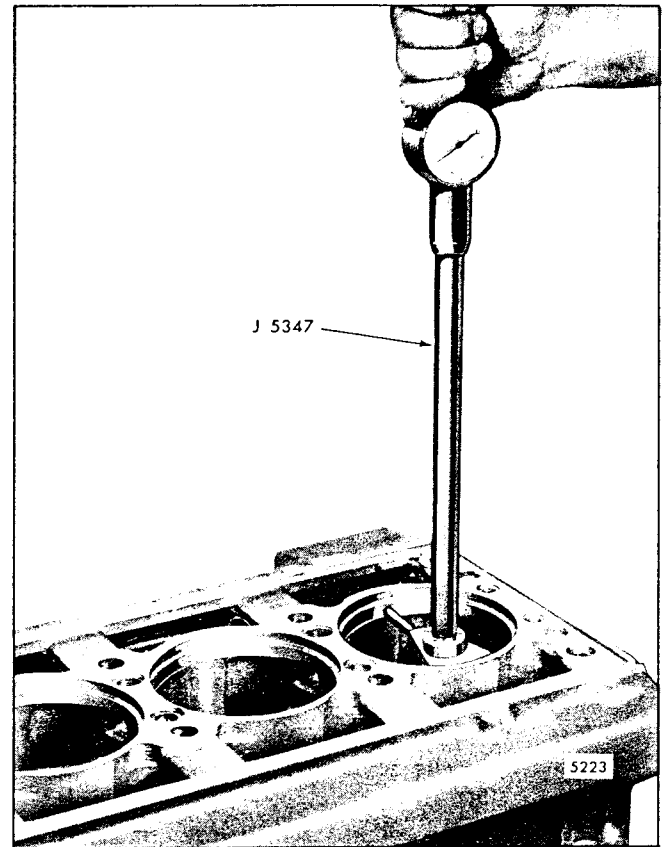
Checking Cylinder Block Bore with Tool J 5347
